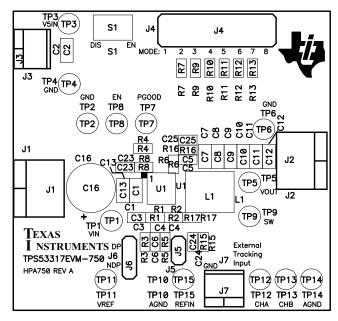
TPS53317EVM-750 Top Layer Assembly Drawing (top view)
